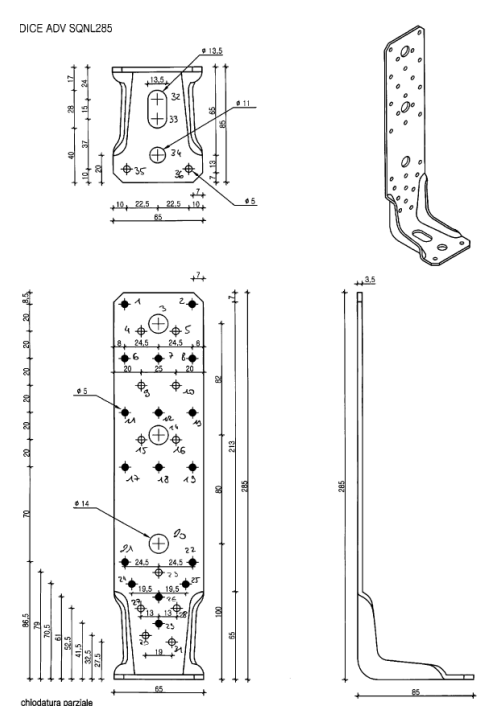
Dimensions of an angle bracket with bolt hole 65x285x85x3,5
